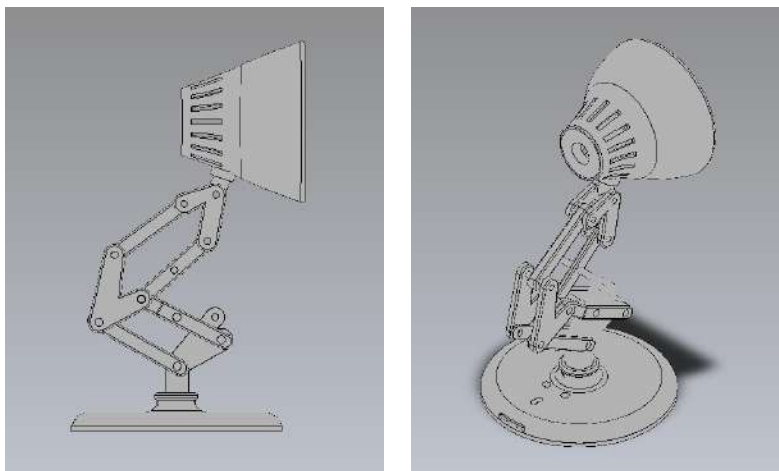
Image of CAD Assemblies in SolidWorks of Luxo Jr. Lamp Prototype
